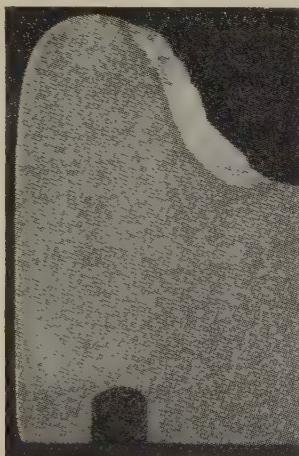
Macrostructure of a locomotive tyre built up by submerged arc welding in the horizontal position.
